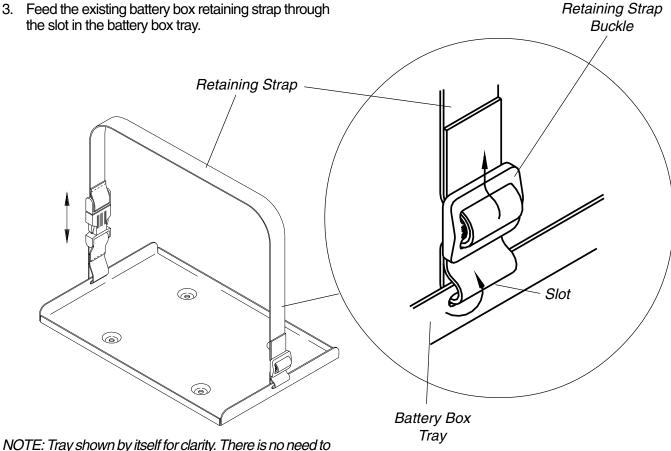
REPLACING BATTERY BOX RETAINING STRAP
